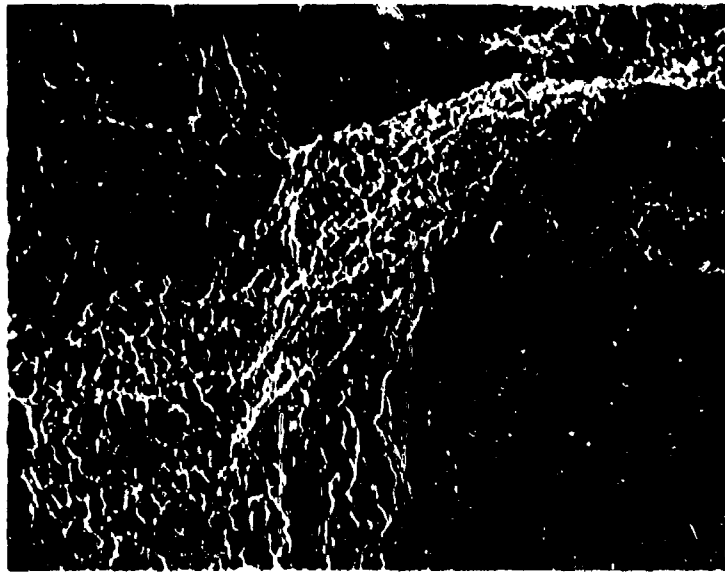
Fracture surface of a porosity defect, 650x.
